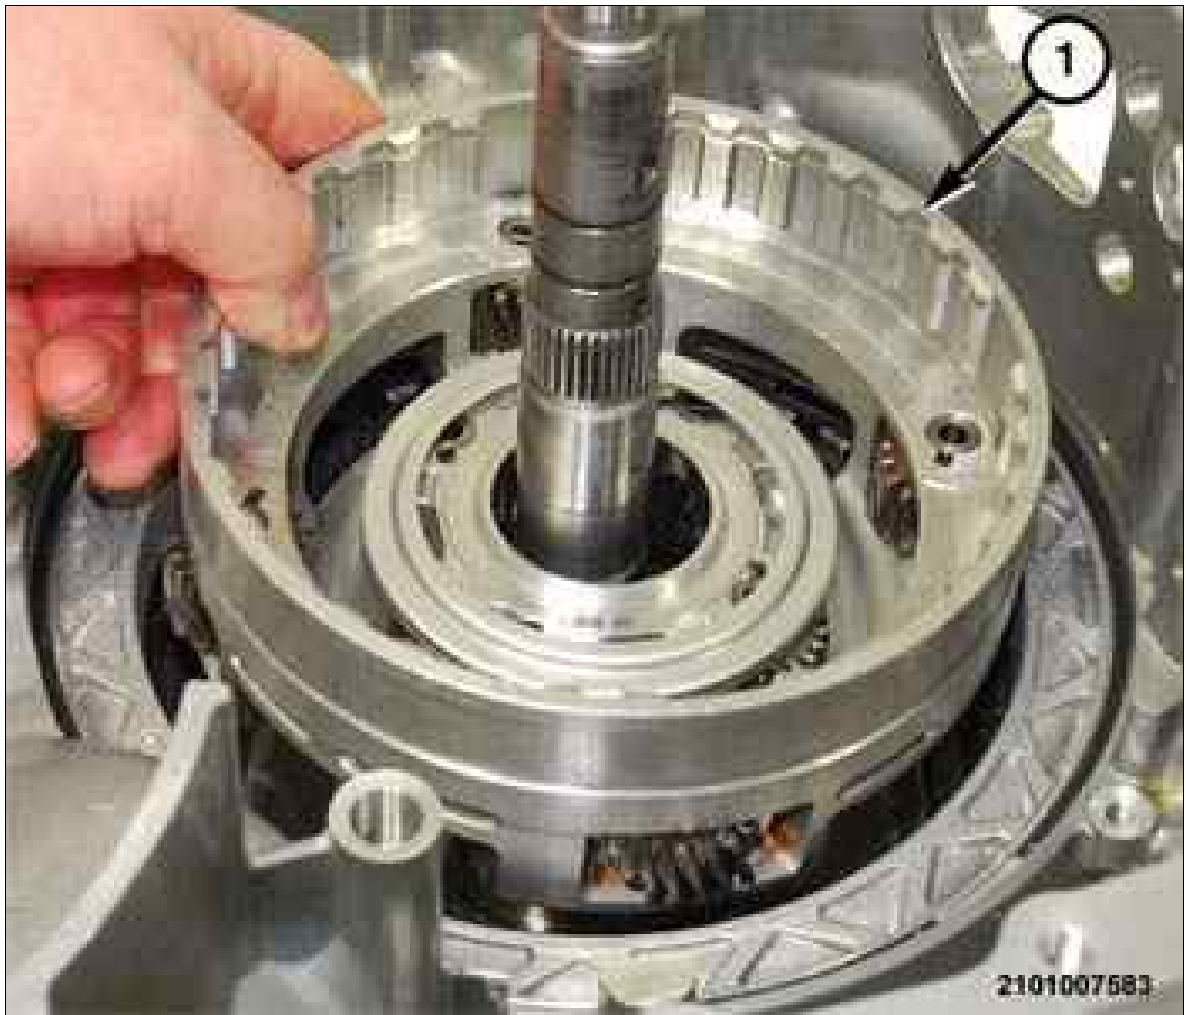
Snap Ring, D-clutch Piston Retainer, Transmission Housing & Special Tool
